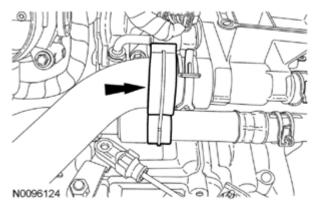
Identifying Coolant Hose Retainer Courtesy of FORD MOTOR CO.
